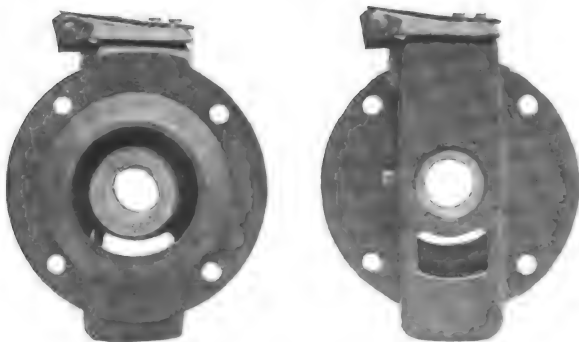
BEARINGS AND BEARING HOUSINGS, WESTINGHOUSE "TYPE K" CRANE MOTOR.
